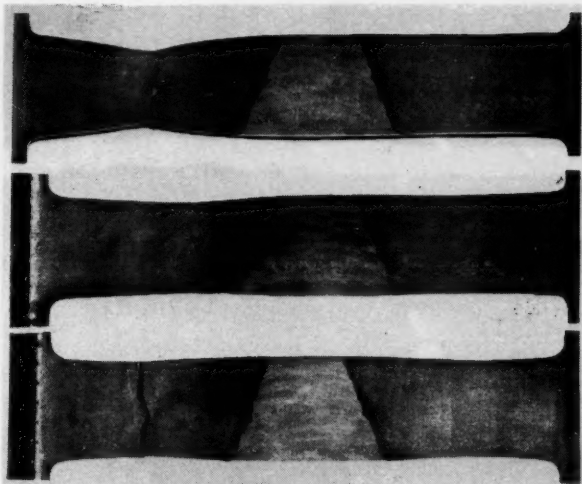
FULL SECTION TENSILE TEST DEMONSTRATING SUPERIOR TENSILE STRENGTH OF WELD METAL. RUPTURE OCCURRED AT 62,000 TO 67,000 LBS. PER SQ. IN. DEPENDING UPON THE CASTING STRENGTH.
